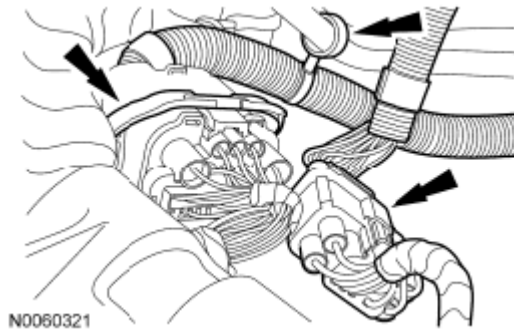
Locating Electrical Connectors And Wiring Harness Retainer
